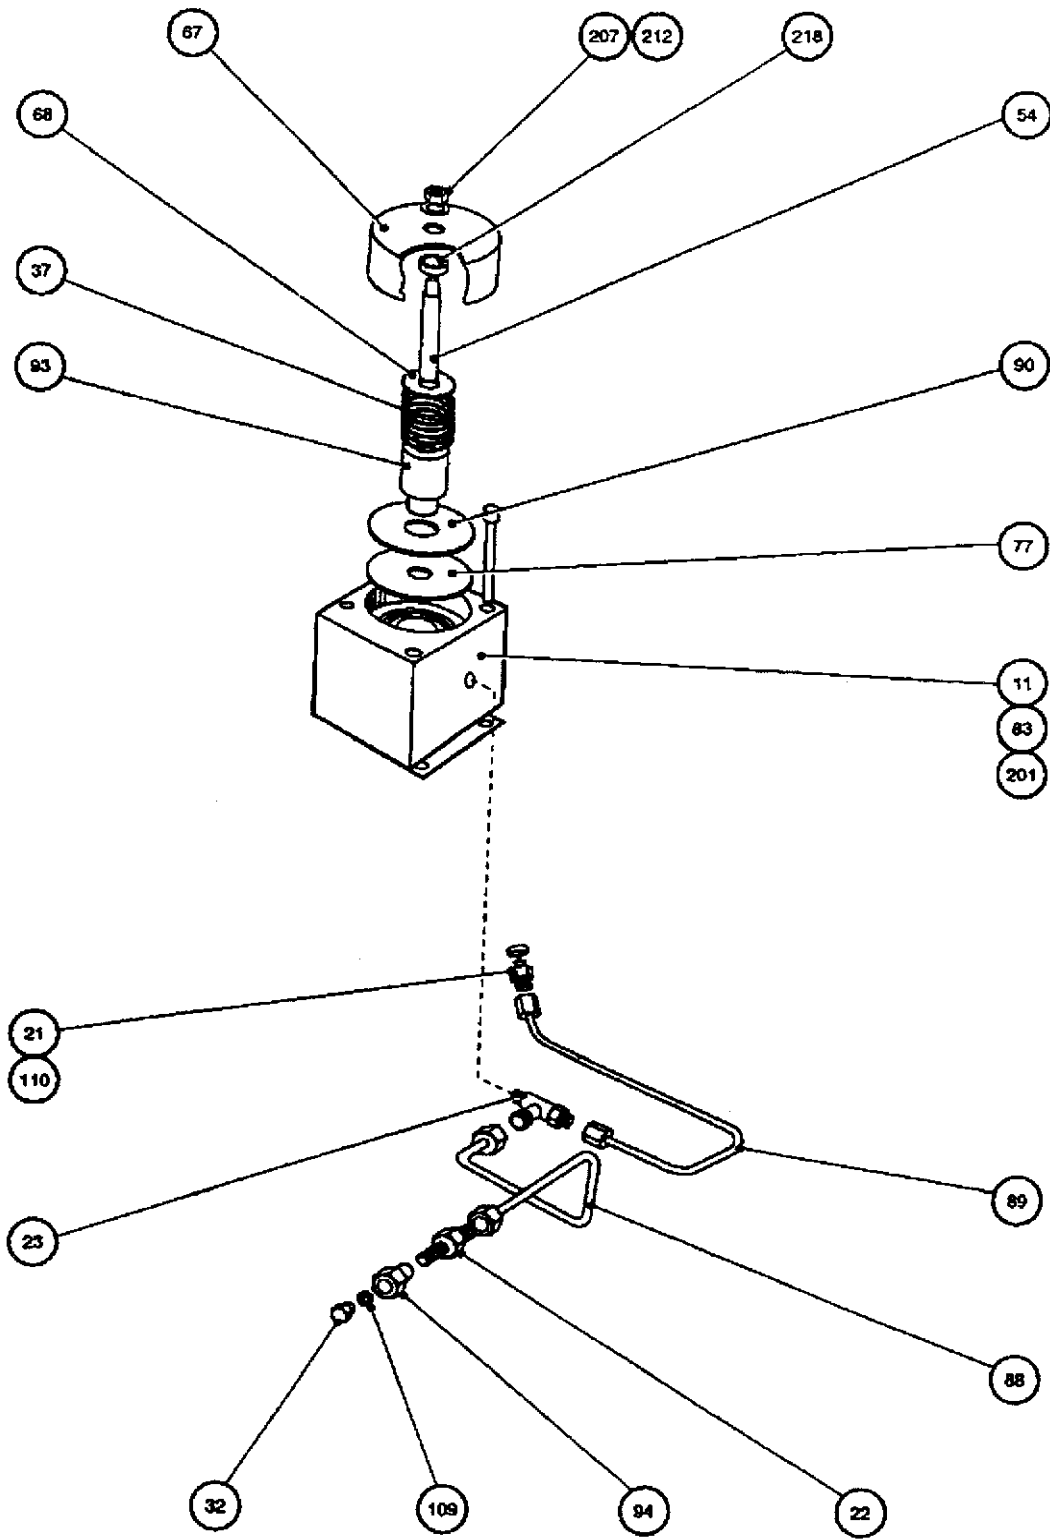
(E) EM1175S/E1M275S Oil distributor sub-assembly
